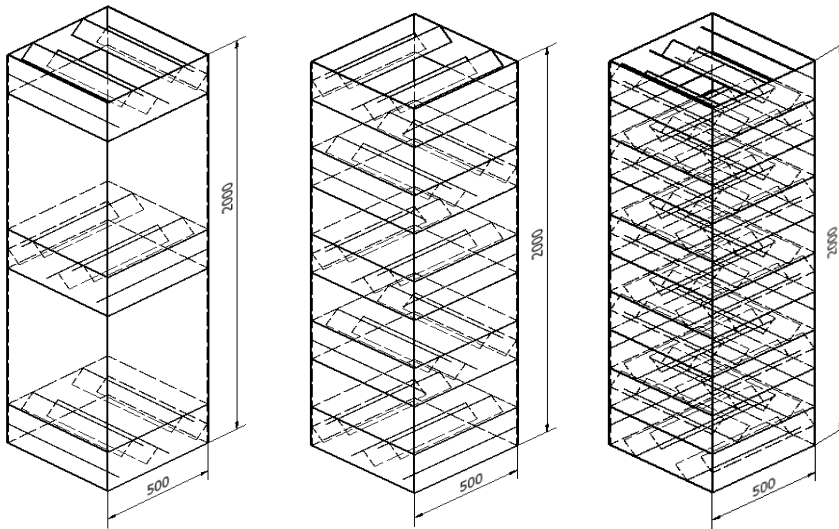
Static mixer with 3, 5 and 10 mixing elements
